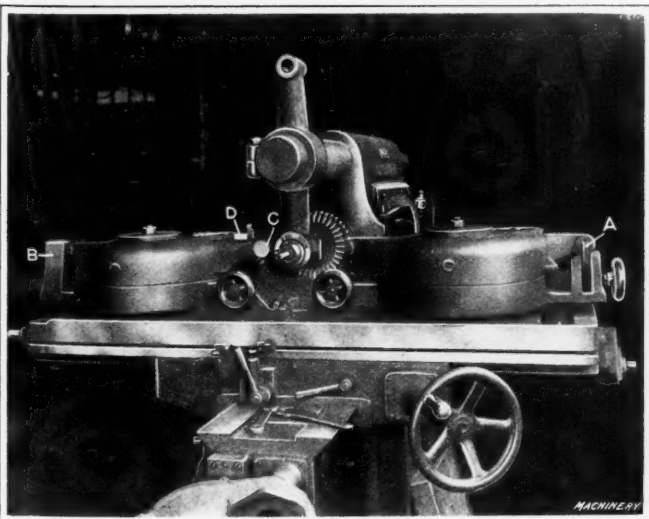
No. 3 Cincinnati Milling Machine for straddle-milling Bosses on Suspension Arms of Flywheel Housings—Work is loaded in One Fixture while Cutters are working on Piece held in Other Fixture
